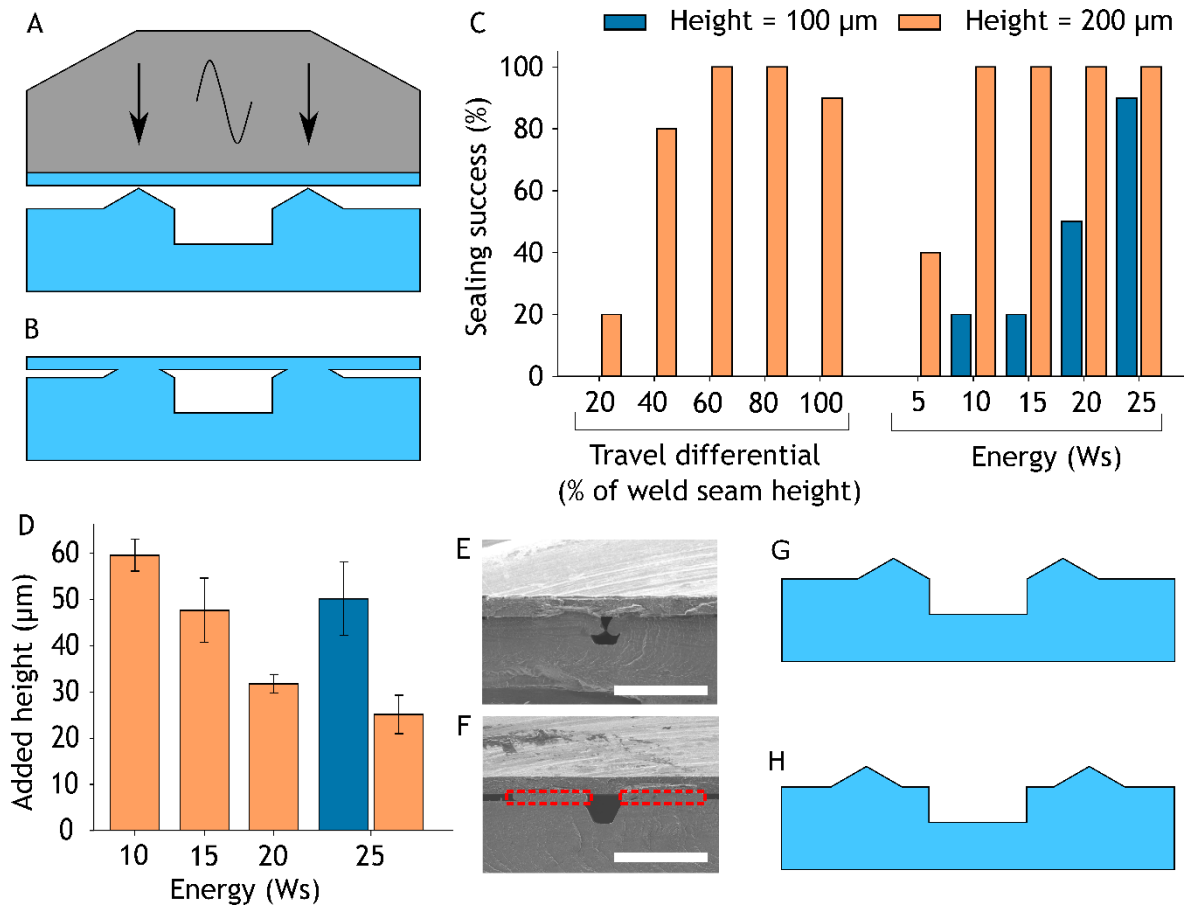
Sealing success of weld seams. A shows a schematic of the welding process with a final welded part shown in B. The sealing success of different welding parameters and weld seam designs is shown in C and the added heights of the successfully sealed channels shown in D. Finally, E and F show cross sectional images of sealed channels where the weld seams were placed adjacent to the channels, and offset by 150 μm respectively. Red dotted boxes show the weld seams and how they fit in the final channel in F. G shows a schematic the weld seams adjacent to the channel while H shows the weld seams with a designed offset (as in F). Scale bars in E and F = 500 μm
